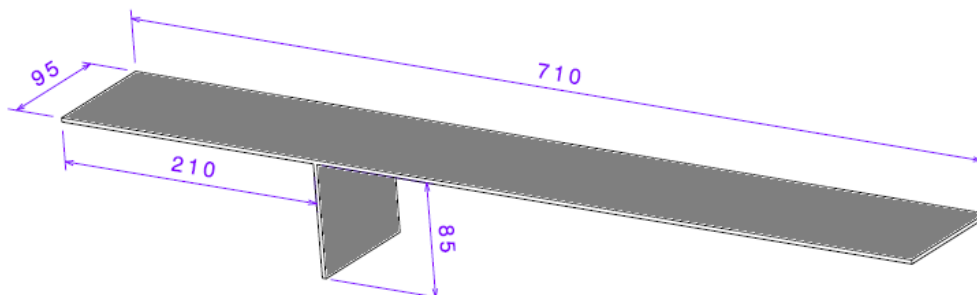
CAD 3D model of T stiffener part with dimensions [mm].
